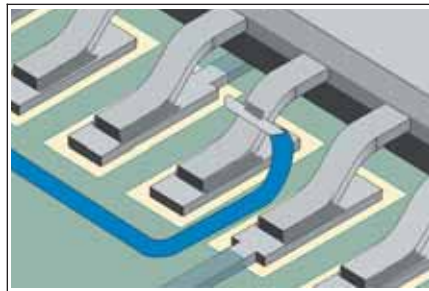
Not Recommended Wire soldered perpendicular to component lead.
